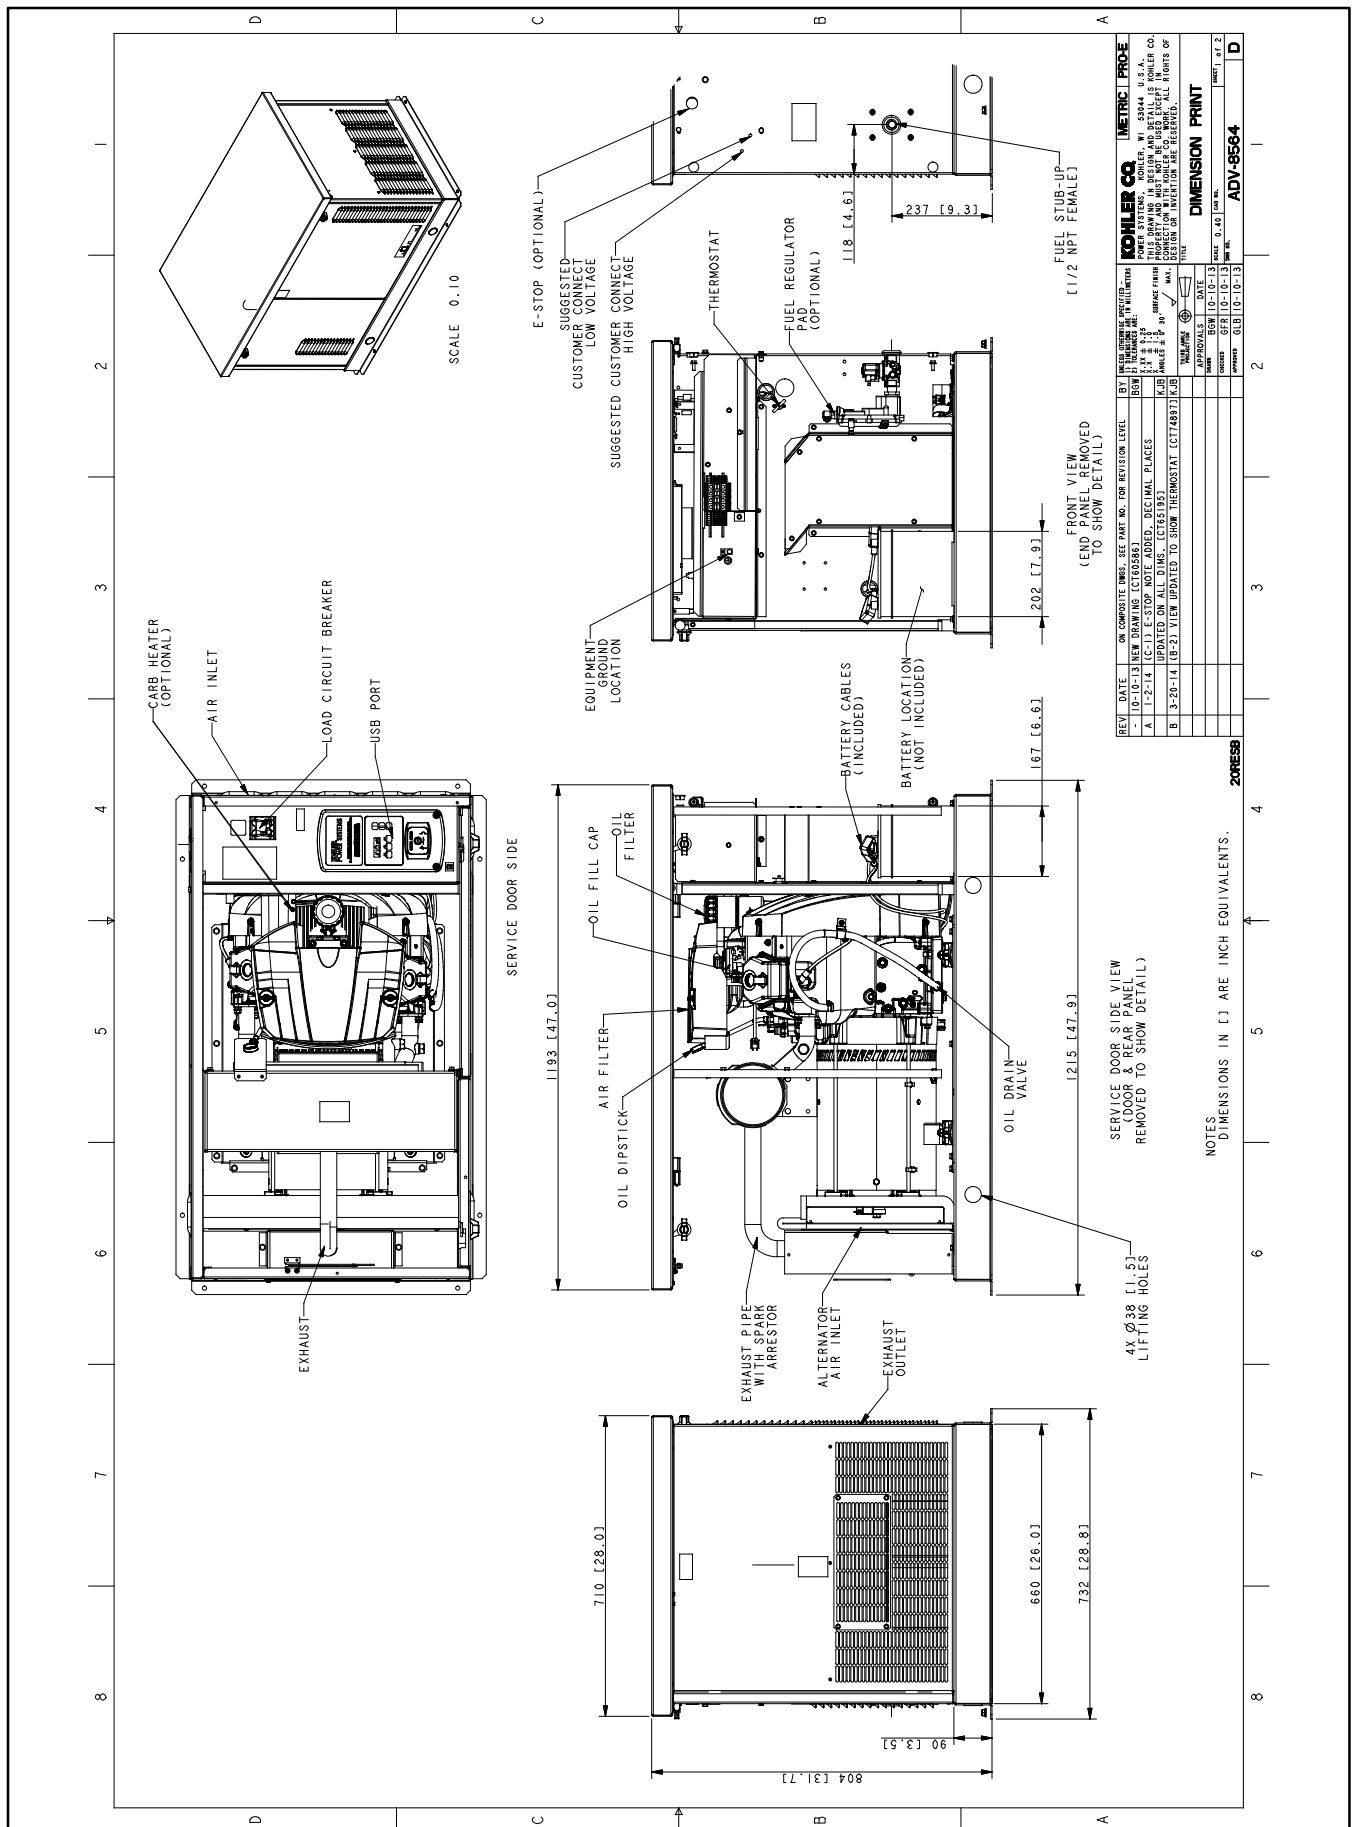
Dimension Drawing (Thermostat Location), ADV-8564 Sheet 1
